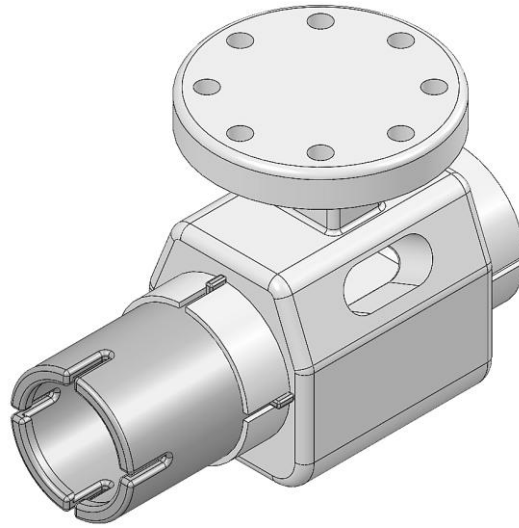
Second prototype gripper mount and telescopic structure tube assembly
